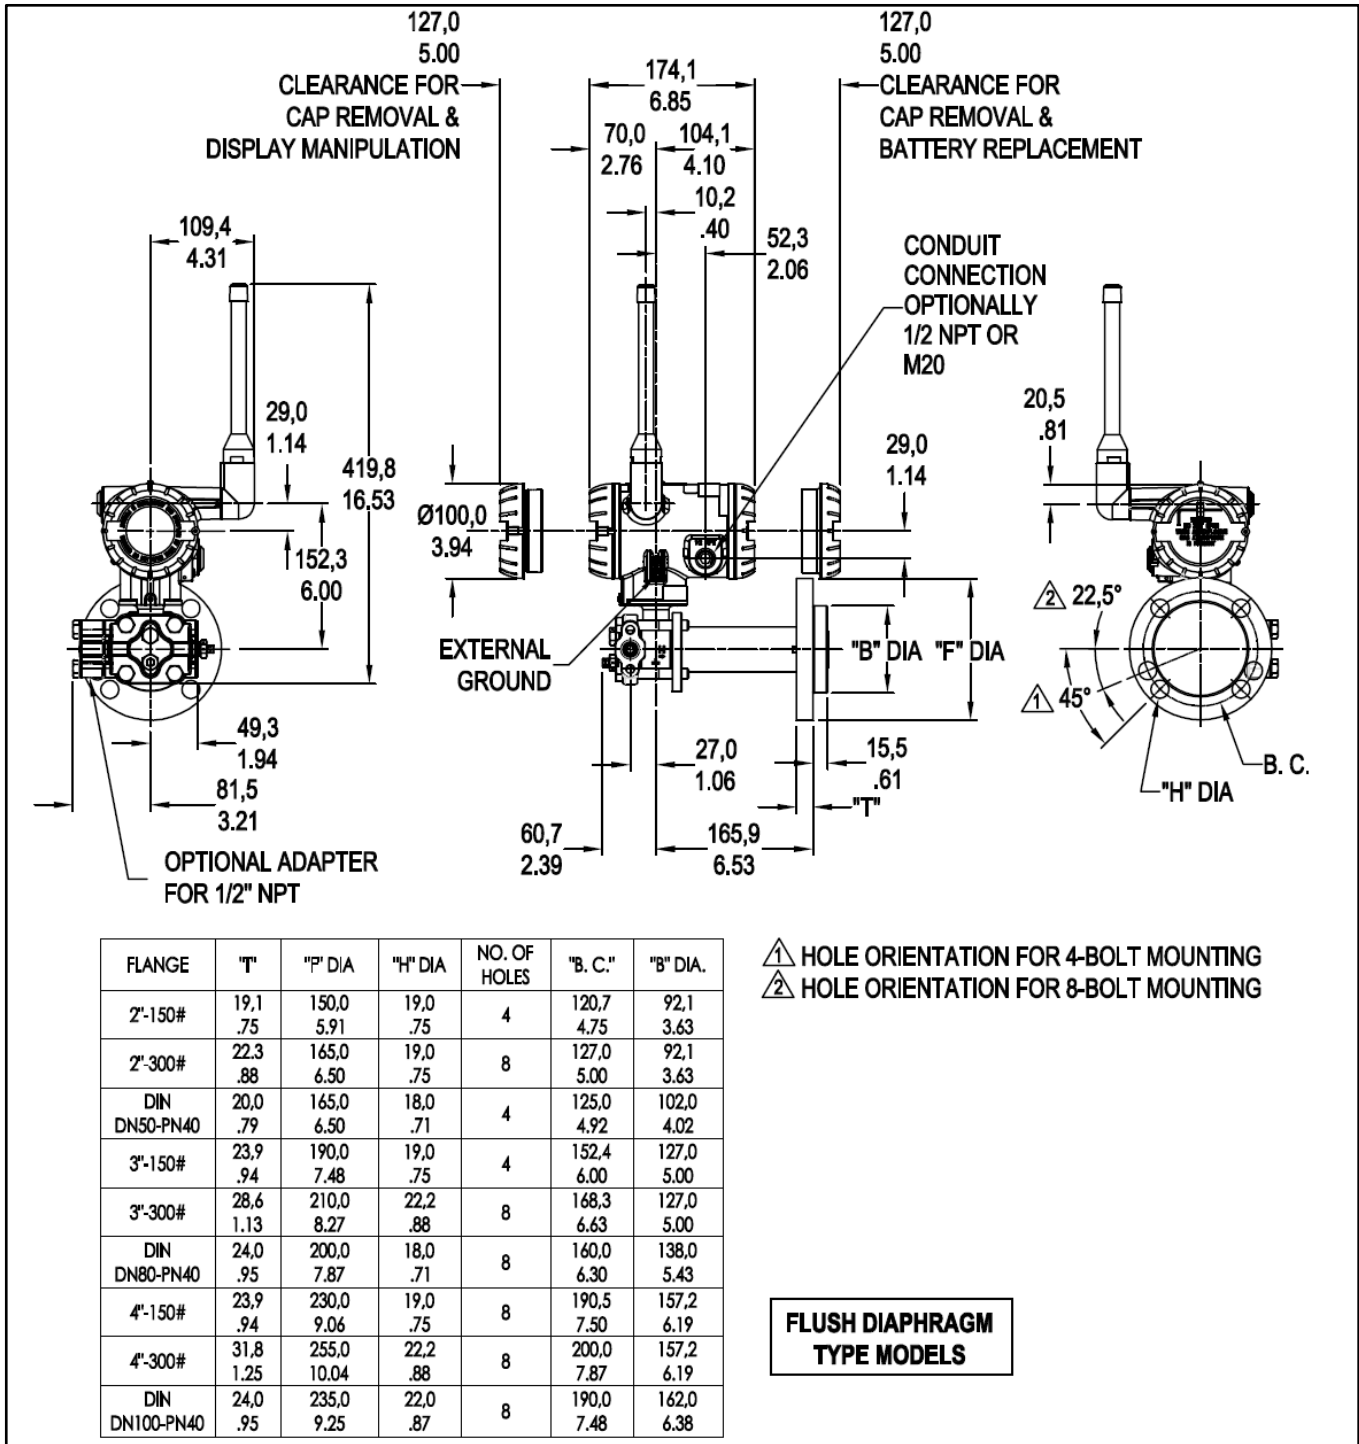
Typical mounting dimensions for flush diaphragm type models STFW828 and STFW724
